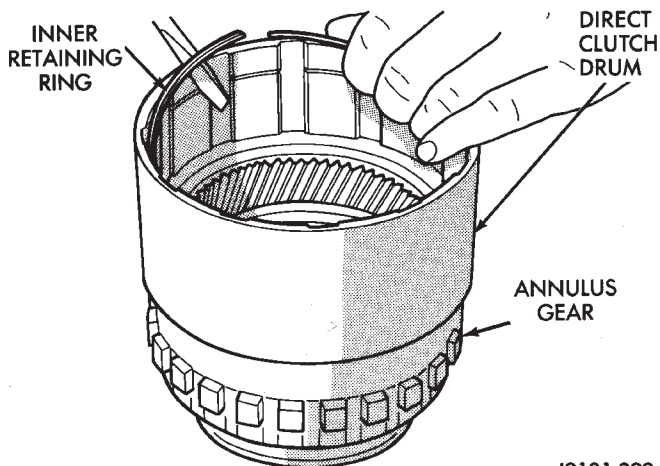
Clutch Drum Inner Retaining Ring Removal
